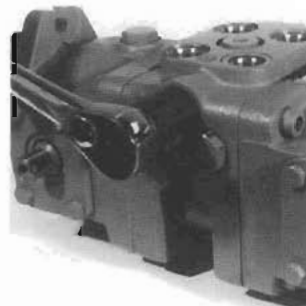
Remove Charge Relief Valve Plug (PT)
